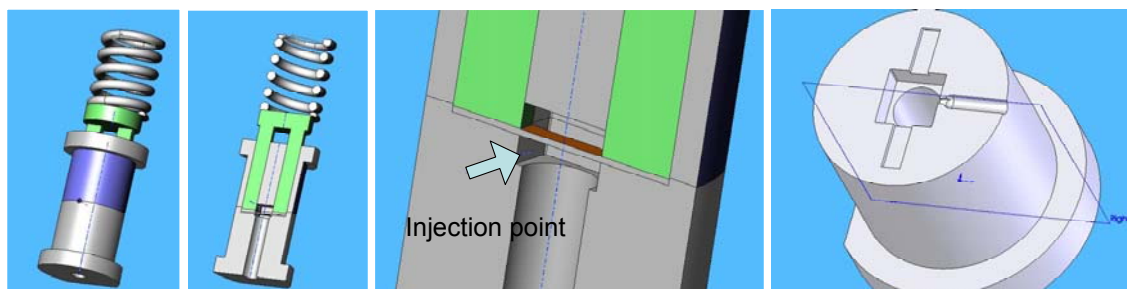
Movable adaptive device for the insert moulding of hybrid demonstrators with metal inserts having different thicknesses. On the right a close-up of half cavity with gate location on the parting line and metal insert housing are shown [Tosello, 2006(2)].
